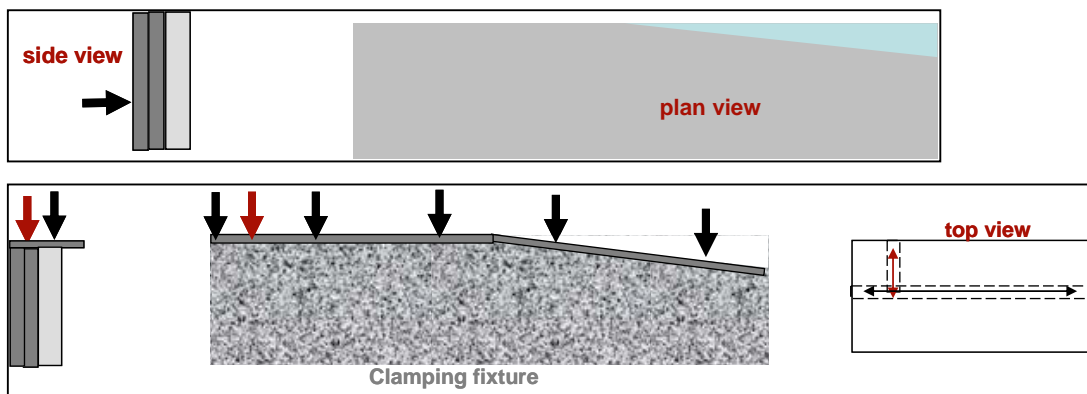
The Third Welding Approach for the Subtended Article, Based on Welding through the Cap.
